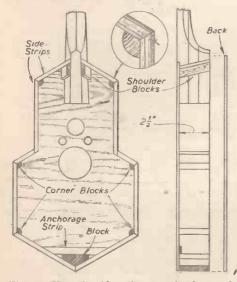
How the side strips are mitred around the front piece prior to adding the back part.
